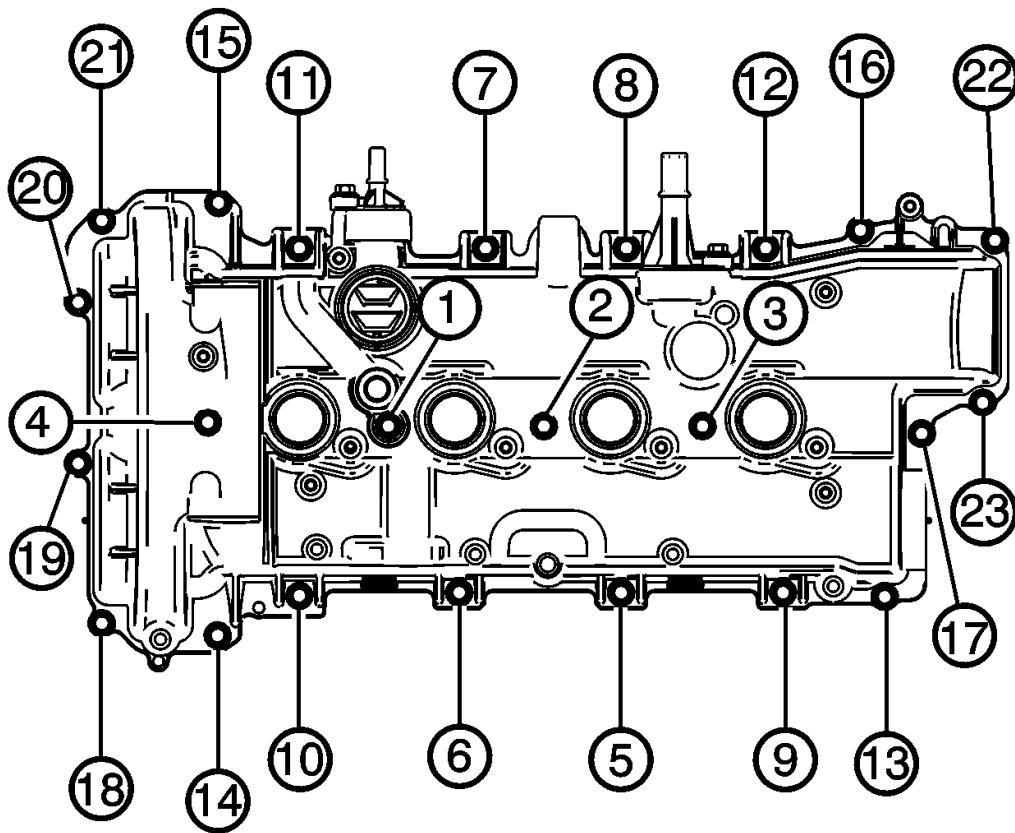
Camshaft Cover Bolt Tightening Sequence
